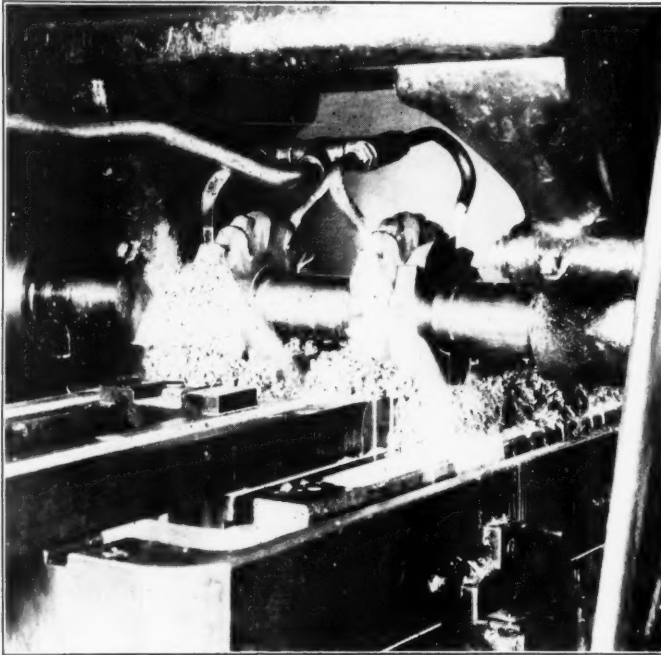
Milling special shaped grooves in a large machine part using specially formed cutters. The manner in which the cutting fluid is being directed to the working elements is of distinct interest.
